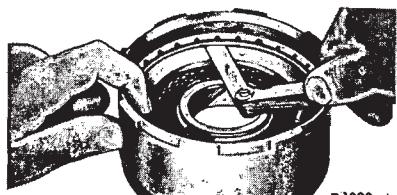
Checking Reverse—High Clutch Snap Ring Clearance
